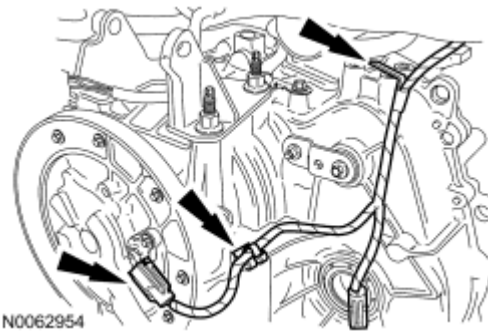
Identifying (TSS) Connector And Harness Retainer
